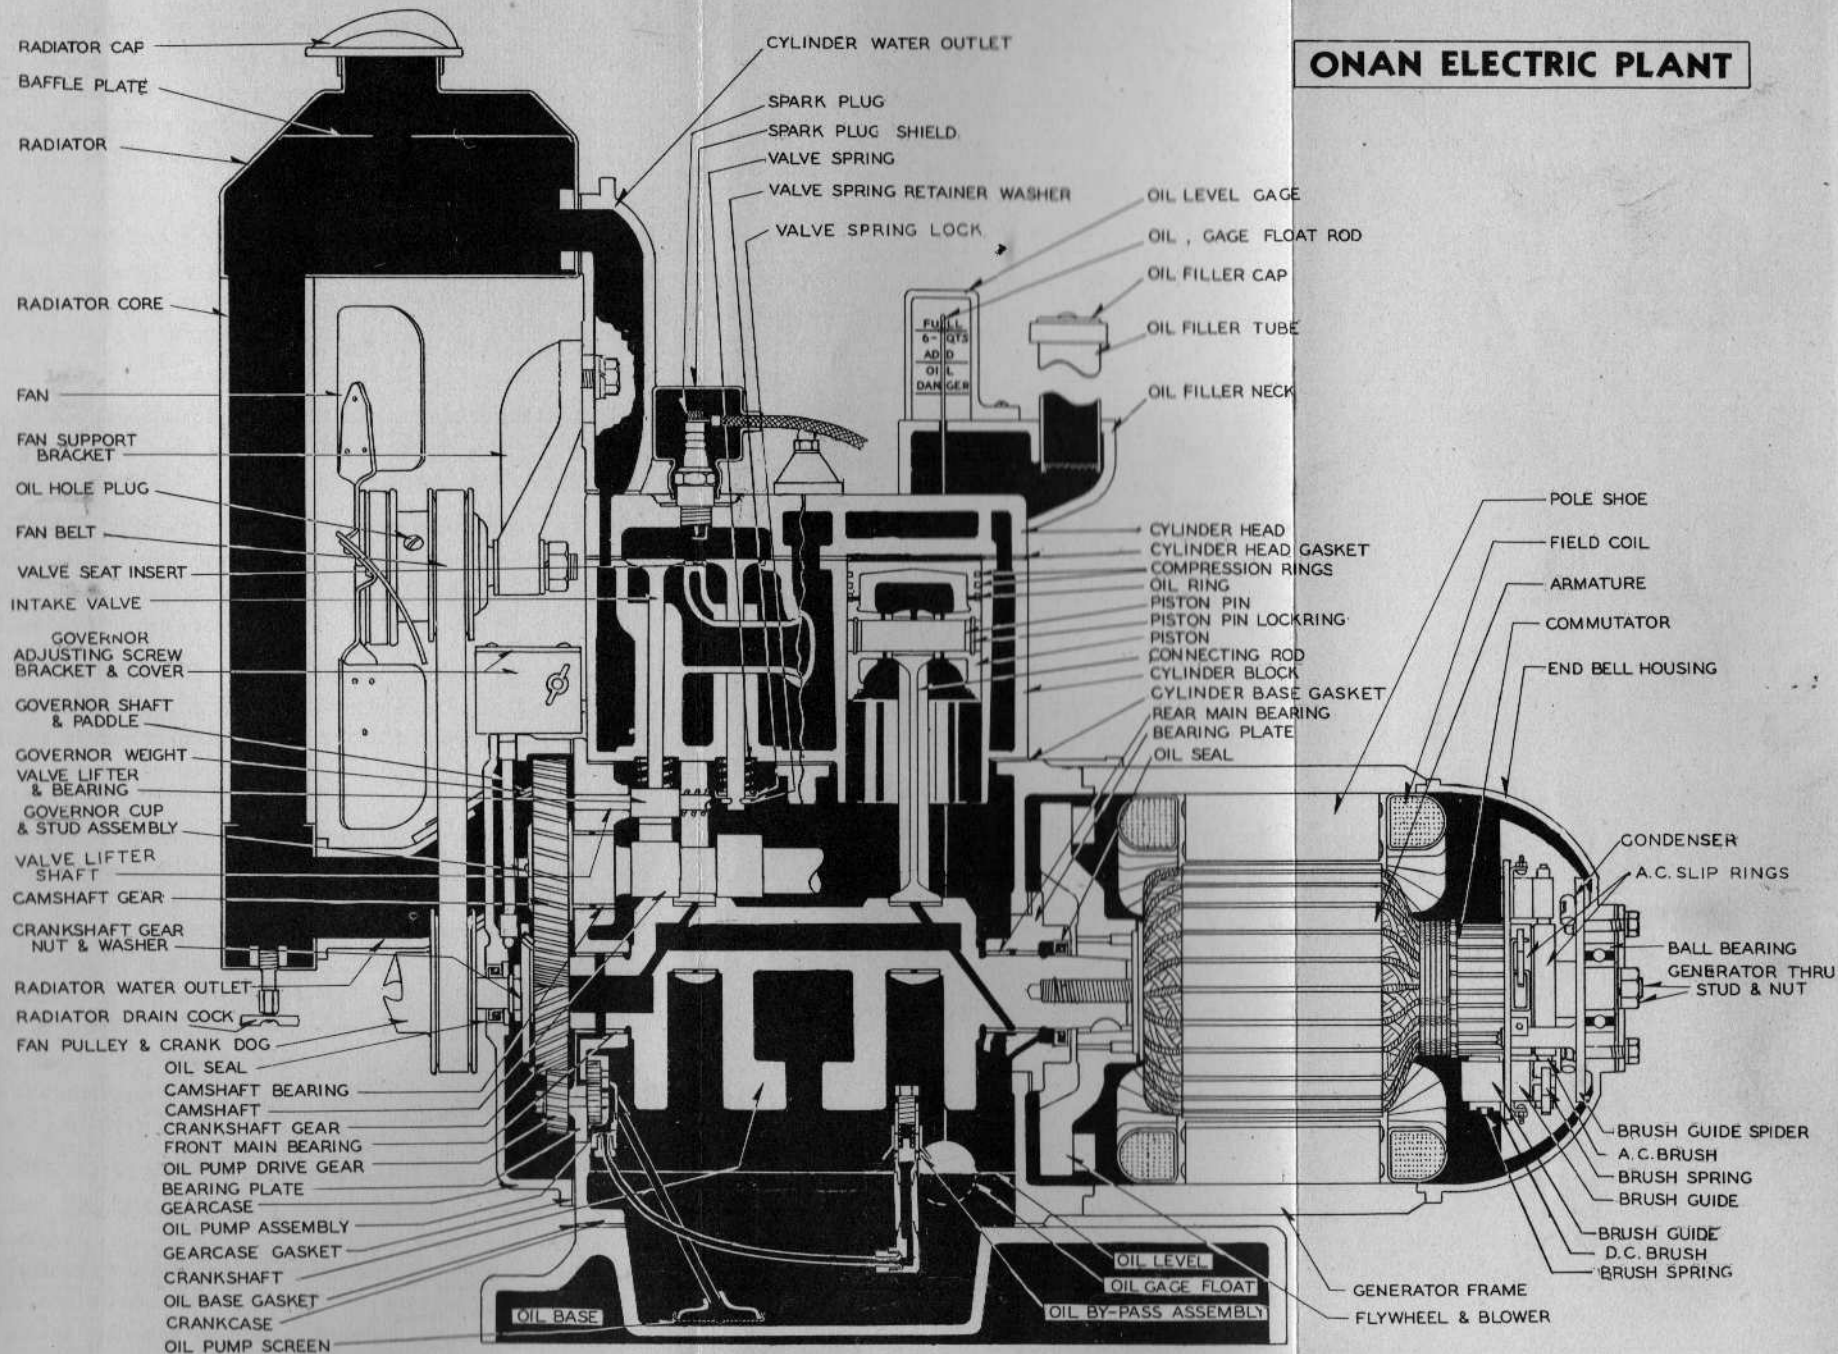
SECTIONAL VIEW OF ENGINE AND GENERATOR (INSERT—LARGE)
